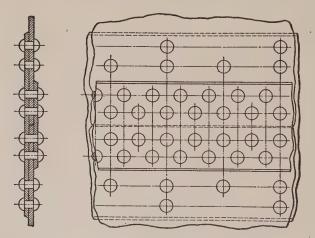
QUADRUPLE-RIVETED BUTT JOINT.
